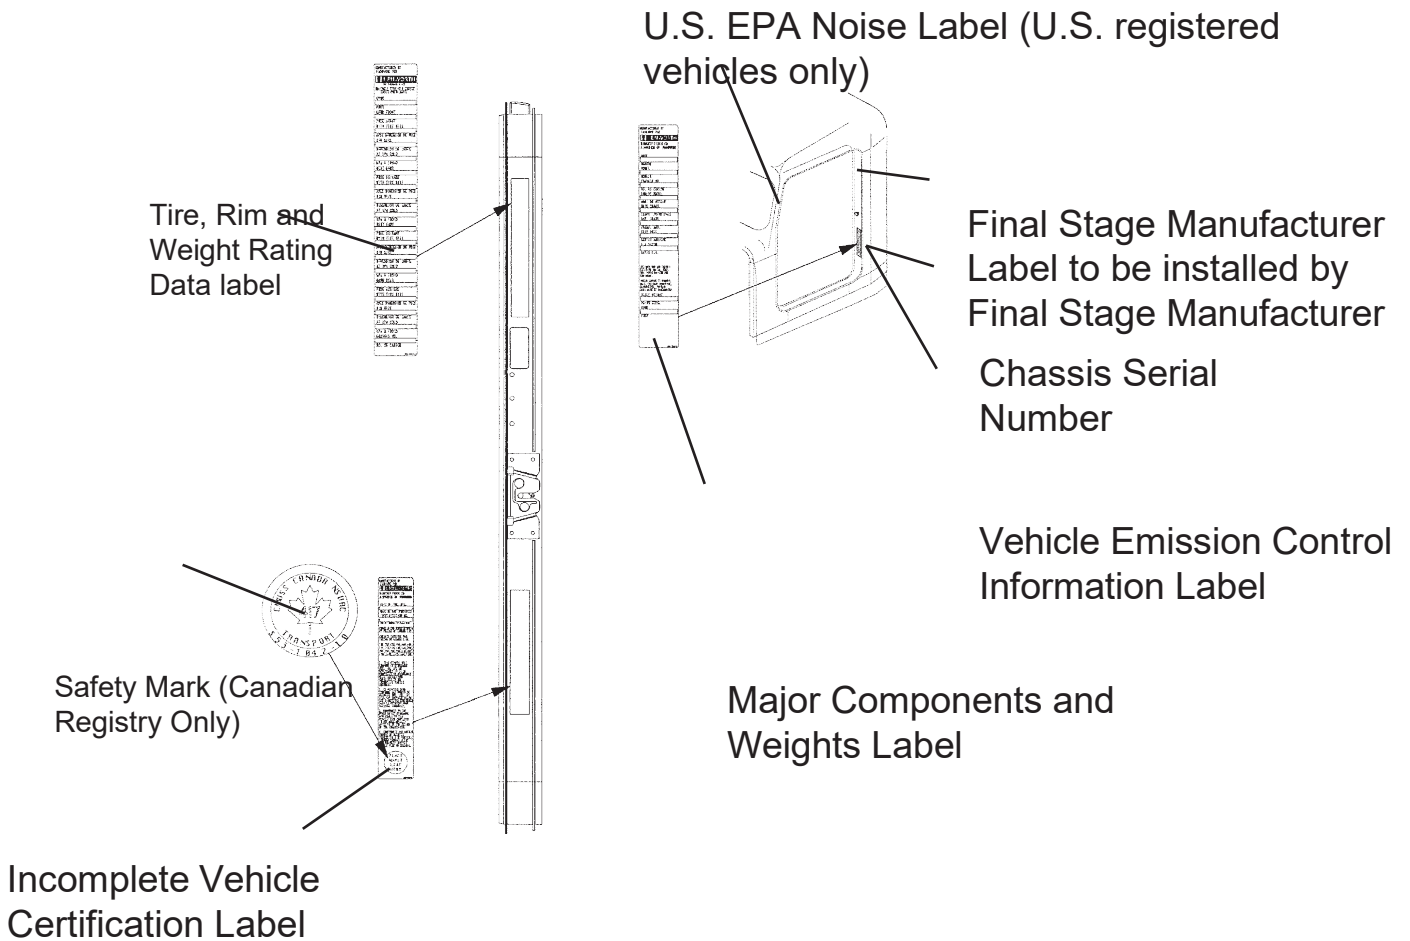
Locations of Certification Labels - Driver's Door and Frame
